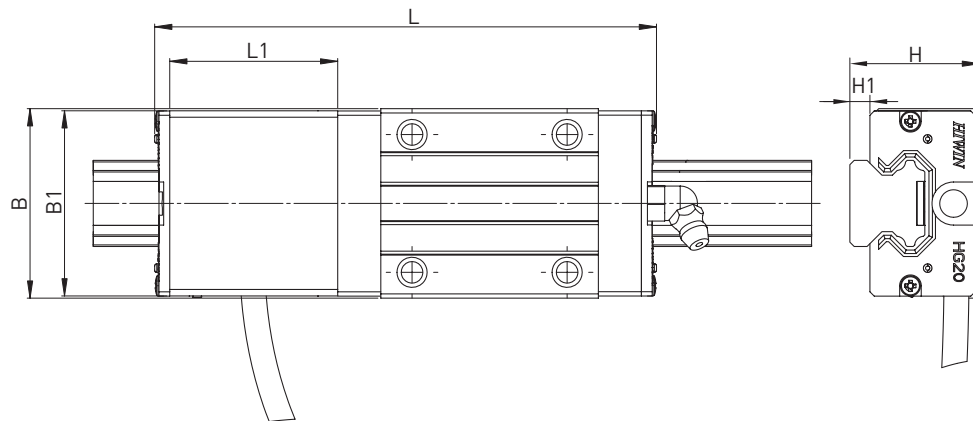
Scale drawing of the HGH20CA block including the MAGIC-PG housing
